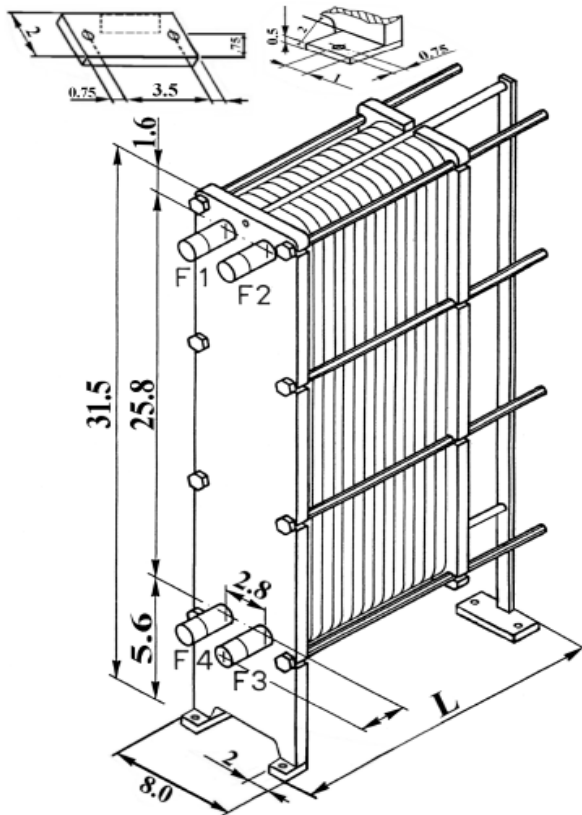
Schematic of plate-and-frame heat exchanger, with dimensions in inches [79]
